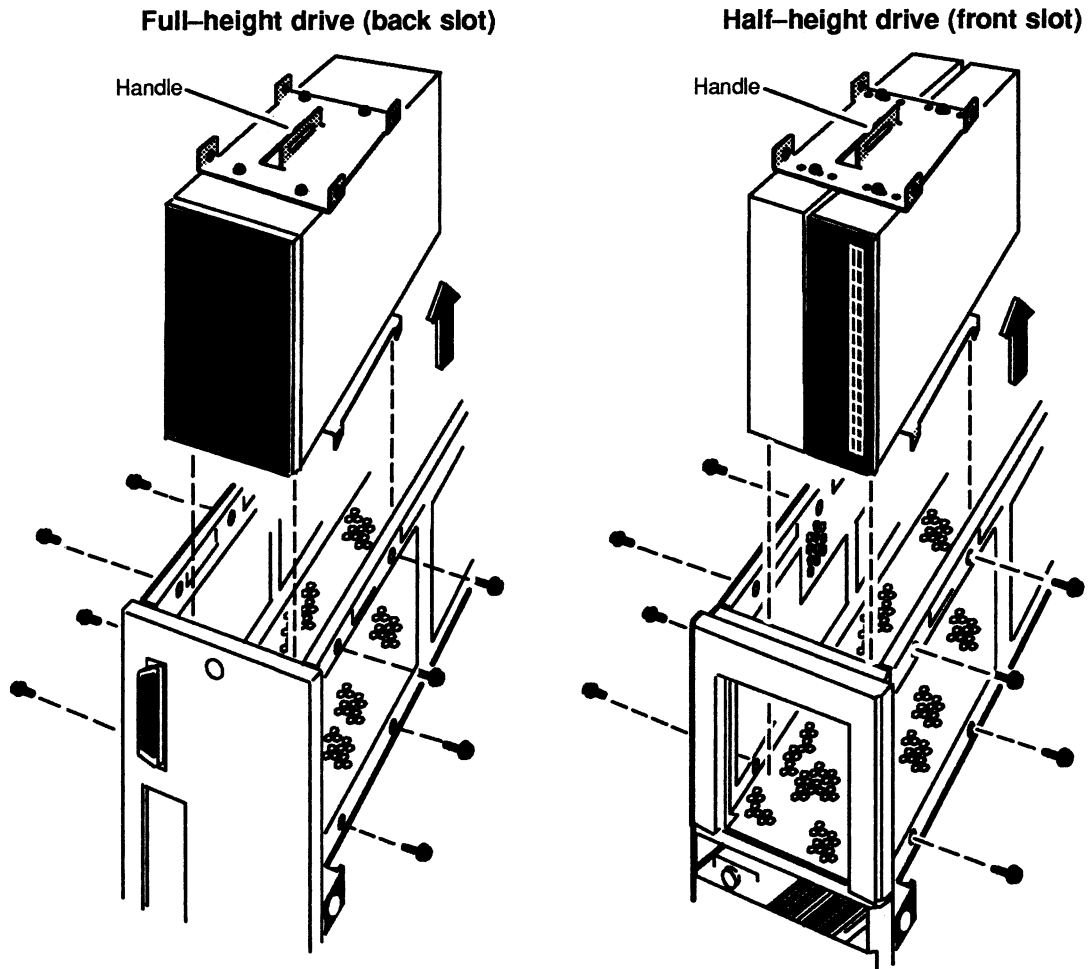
Removing a Drive Assembly from the Computer Unit
